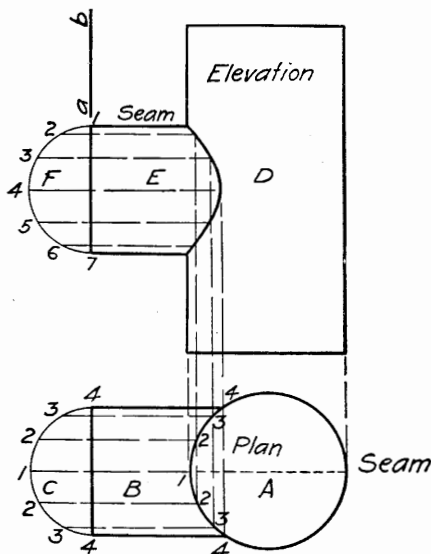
Plan and Elevation for Right Angled Pipe Joint.
